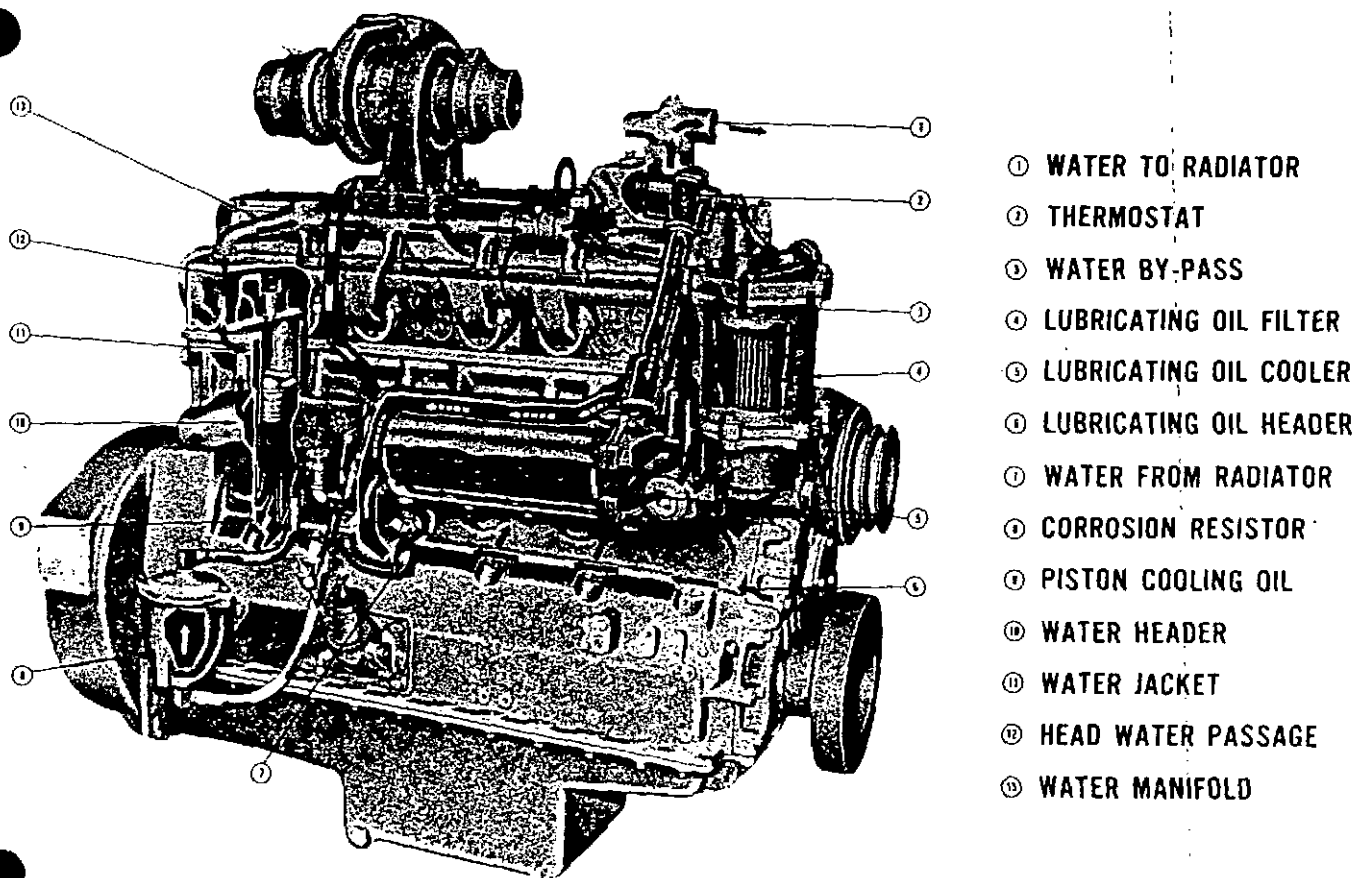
, 1WC19. Coolant and lubricating oil flow - NT-380 Engine (exhaust manifold side)
